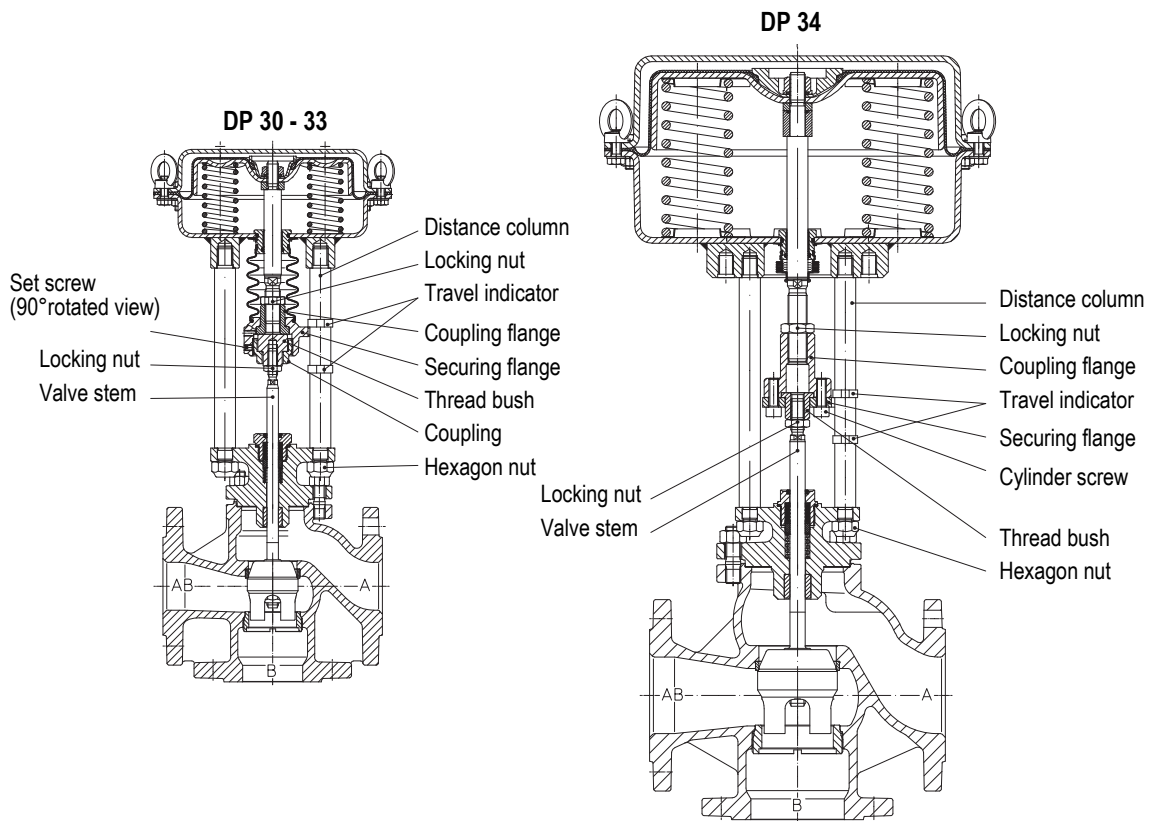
Pneumatic three-way control valve as a mixing valve (path AB-B)
